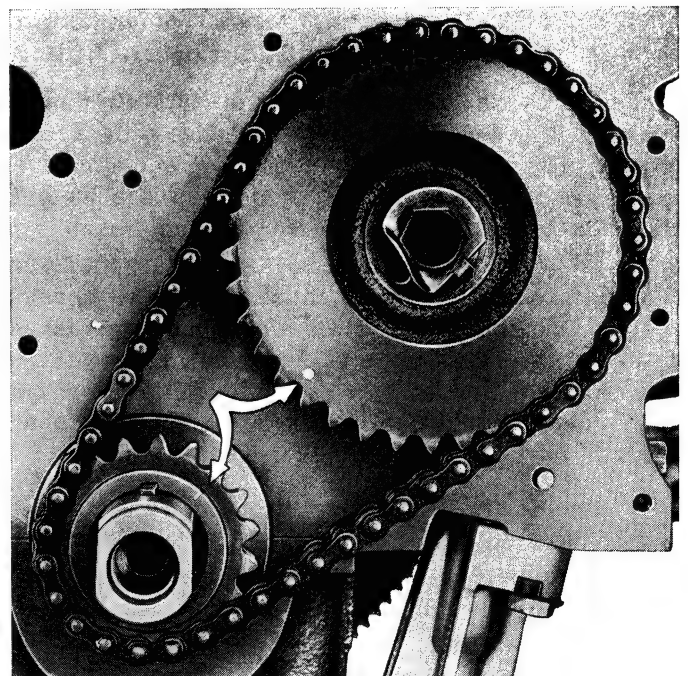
Valve timing marks on drive and driven sprocket (engine 115 C.005).
